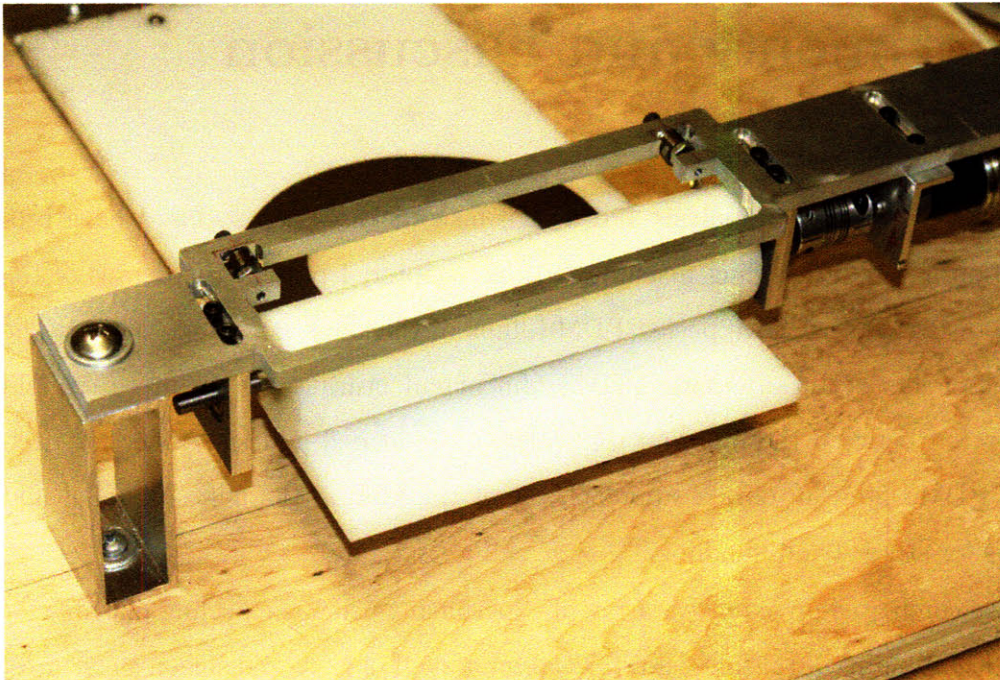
The prototype of an automatic peeling machine developed in this thesis includes an adhesive roller peeler and a wafer carrying surface spring-loaded against the roller.
